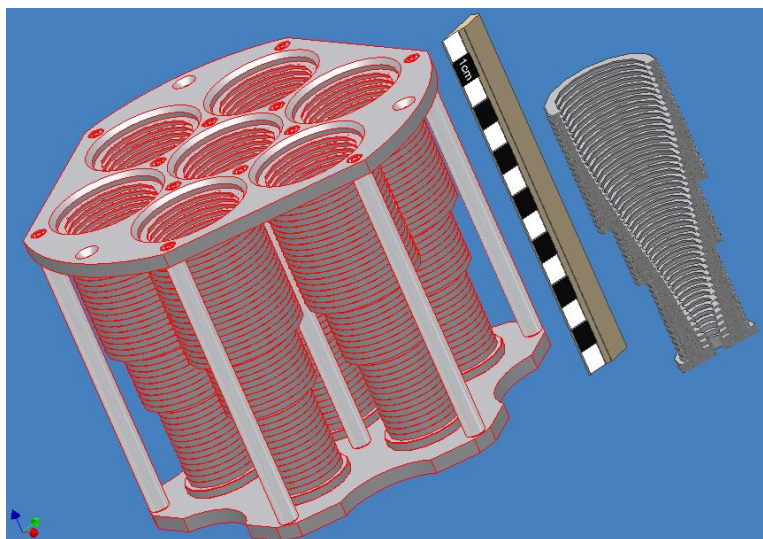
CAD drawing of the 7-feed horn prototype to be made using the platelet technique. The scale has divisions of 1 cm.
